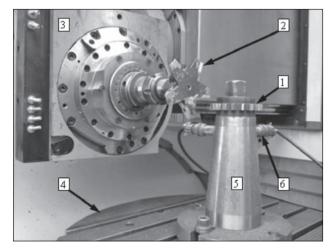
Investigation scheme: 1 - gear wheel, 2 - the head, 3 - the machine tool spindle, 4 - rotatable table, 5 - fixture of the gear wheel
